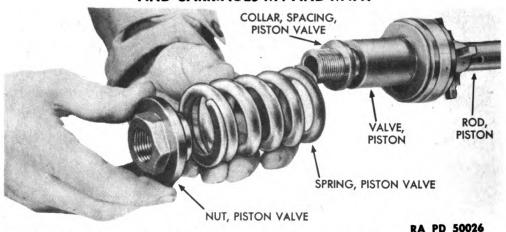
Removing the Piston Valve Nut and the Piston Valve Spring
